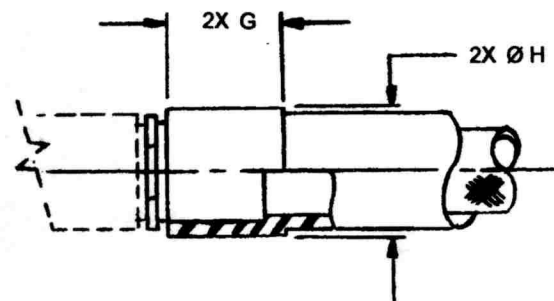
INTEGRAL FIRESLEEVE CUFF / 13/
